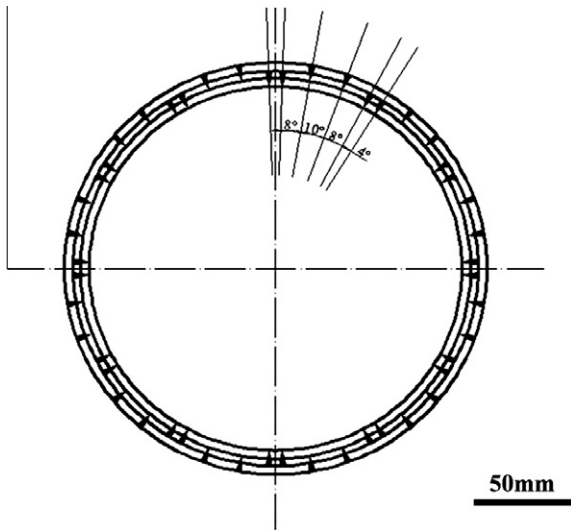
Laser-welding joint geometric position relationship of the multi-sheet cylinder sandwich structure.
